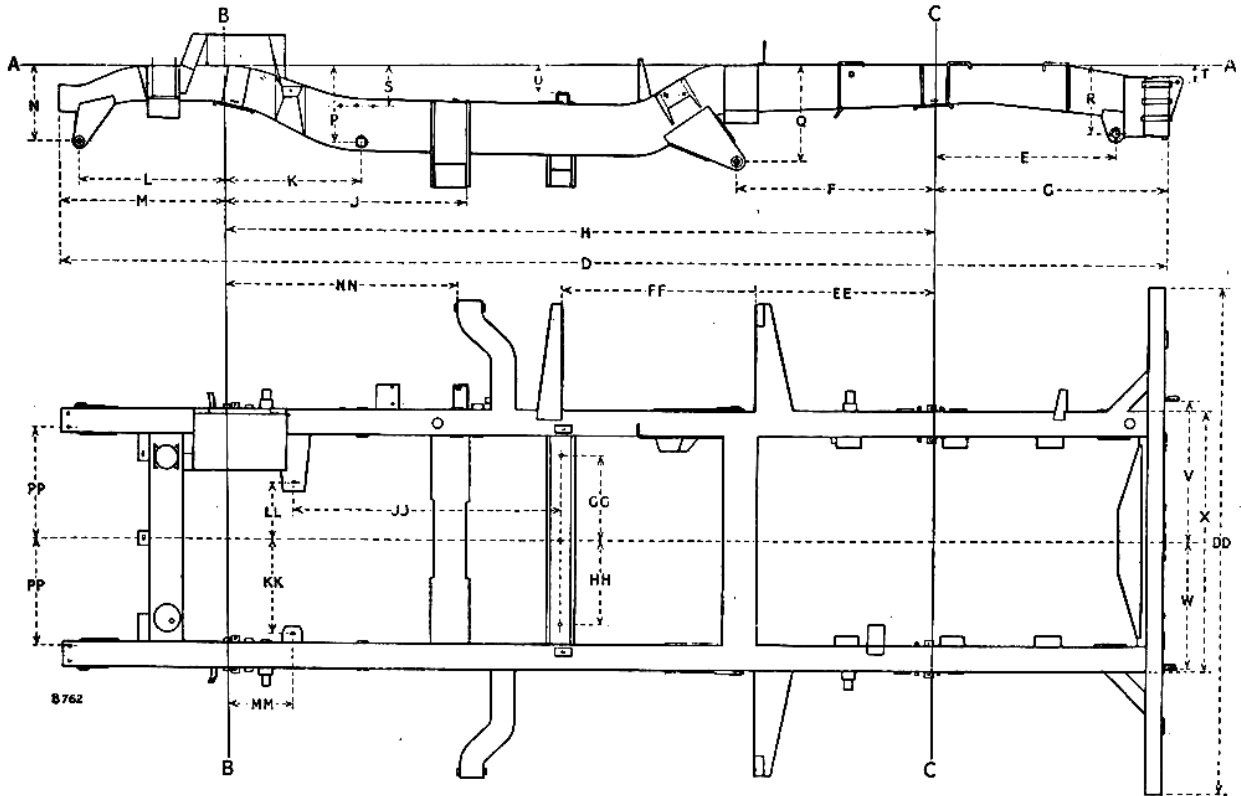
Chassis frame dimensions (Laud-Rovers 86 and 88).
